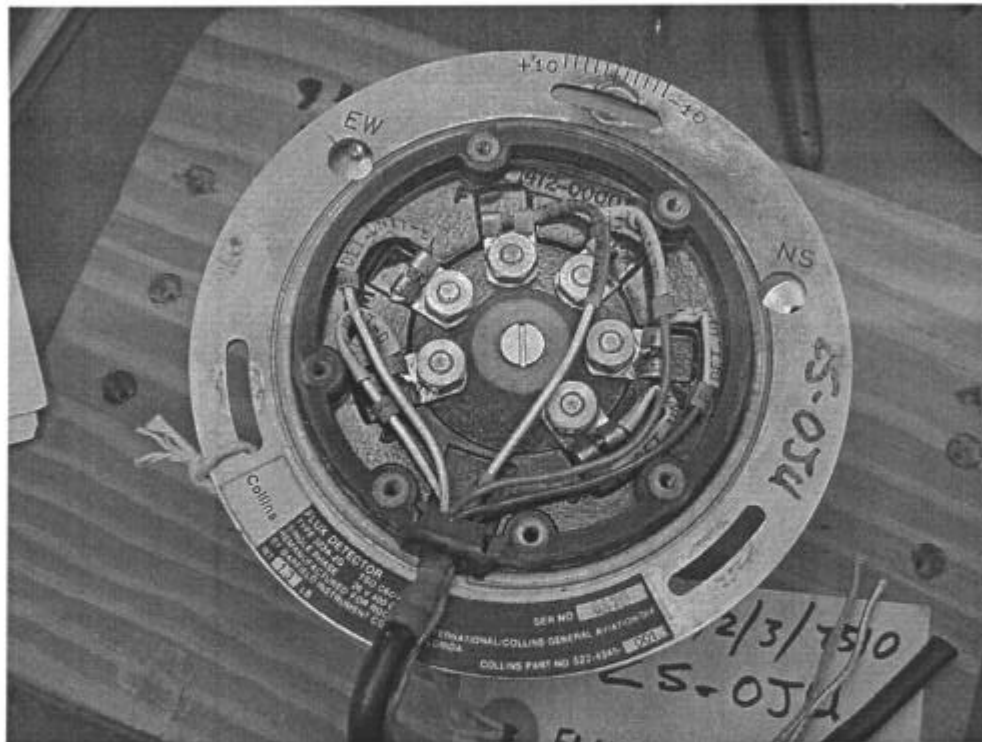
Flux Detector with cover plate removed showing original aircraft wiring
